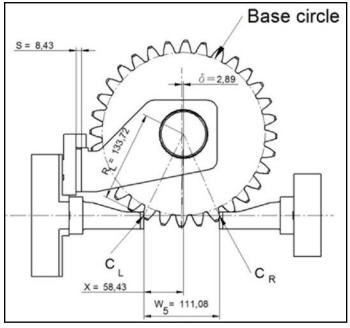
Bending fatigue test apparatus: main dimensions of rig and gear.
